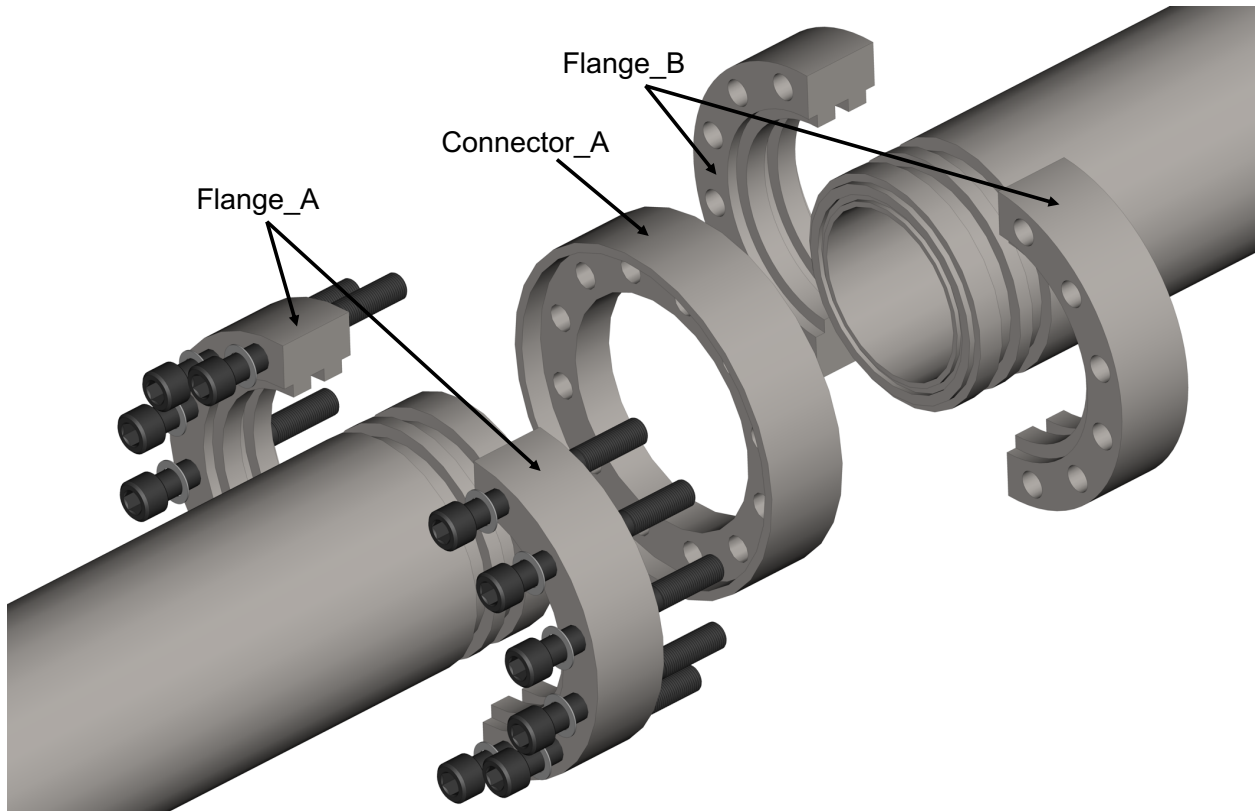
Exploded view of the high-pressure weldless flange assembly used on the high-enthalpy shock tube facility. The flange assembly consists of:  $2 \times$  clearance flanges (Flange\_A),  $2 \times$  threaded flanges (Flange\_B),  $1 \times$  alignment collar (Connector\_A), and  $12 \times$   $5/8$ -18 $\times$ 5.00 in. bolts and washers
